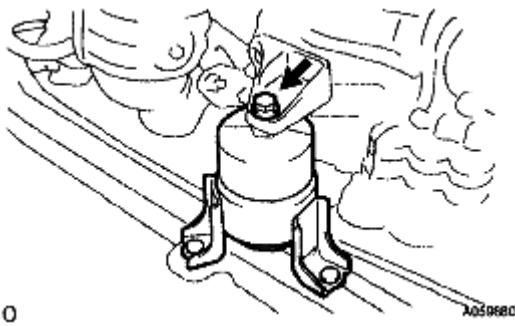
Locating Engine Mounting Insulator FR With Bolt
